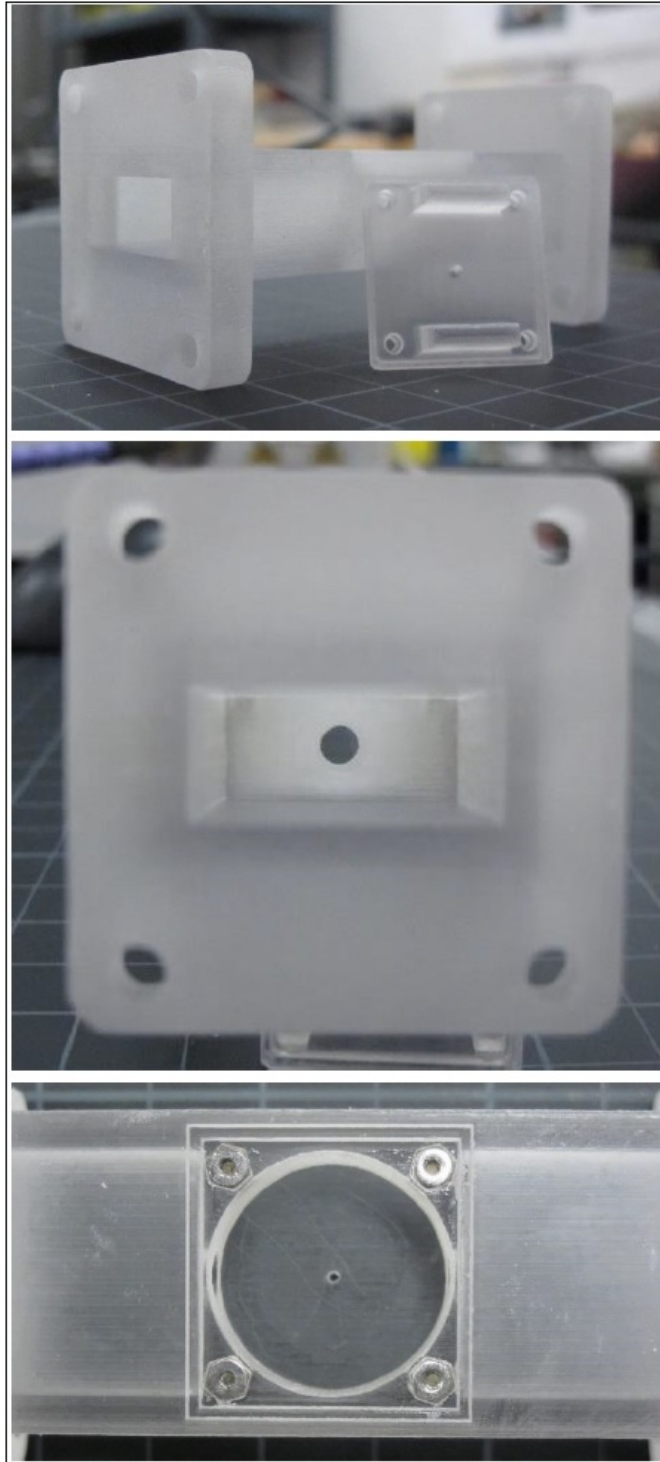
3-D printed prototype of designed cylindrical cavity with removable top (top); internal cavity view of aperture (middle); top down view of cavity with rod sample hole (bottom).
